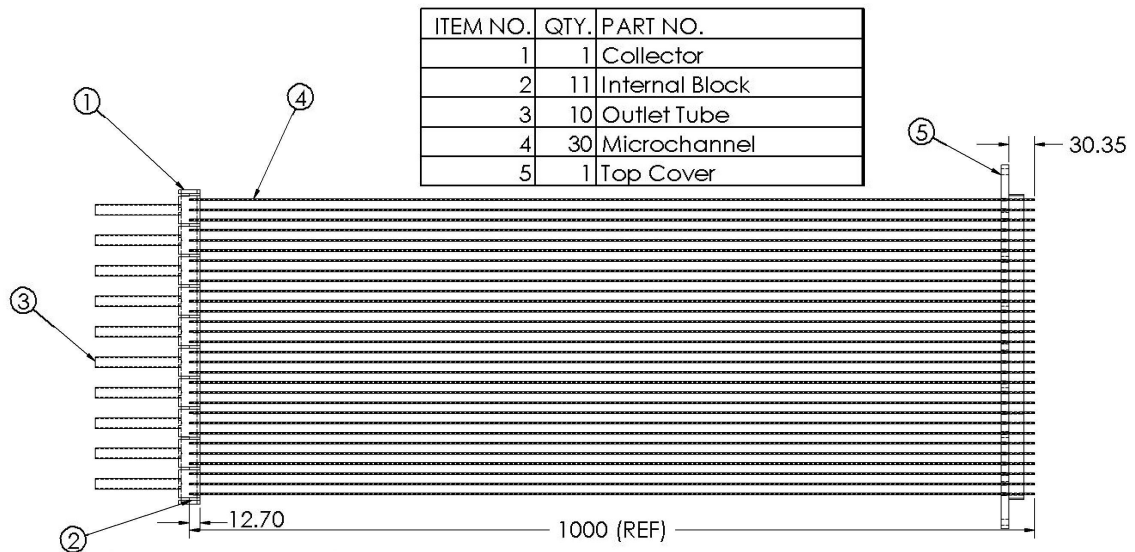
Drawing of Microchannel Heat Exchanger Assembly, with Dimensions in millimeters
